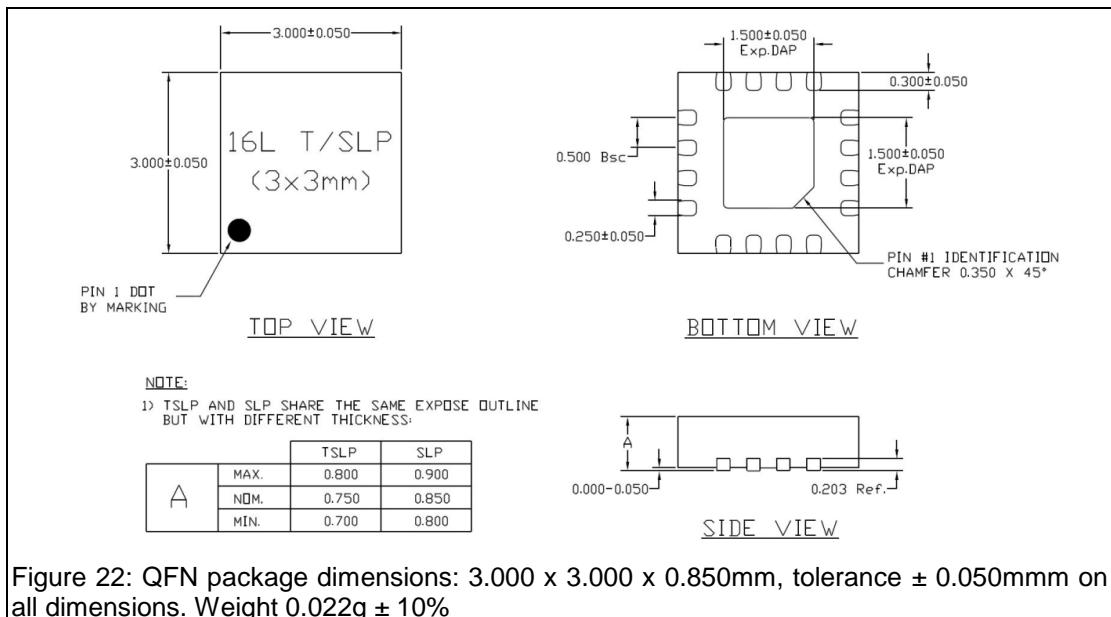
QFN package dimensions: 3.000 x 3.000 x 0.850mm, tolerance ± 0.050mm on all dimensions. Weight 0.022g ± 10%
